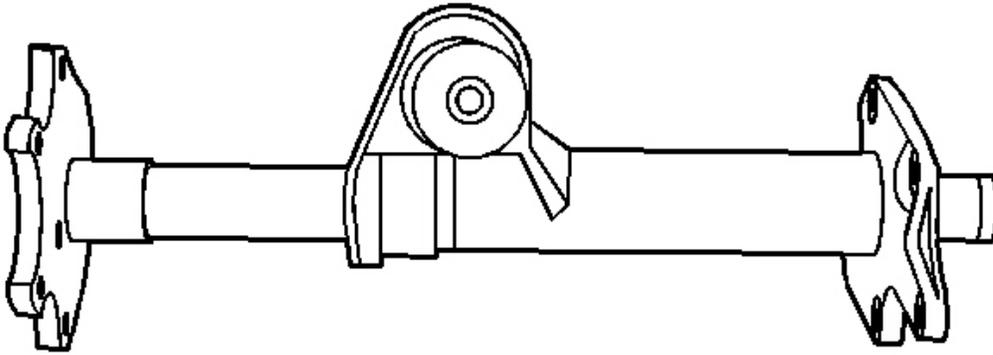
Install Inner Axle Shaft Into Inner Axle Shaft Housing
